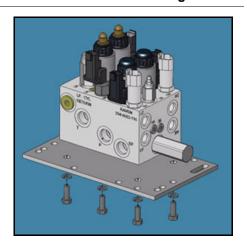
Fittings Installed on the AutoBoom Valve.
